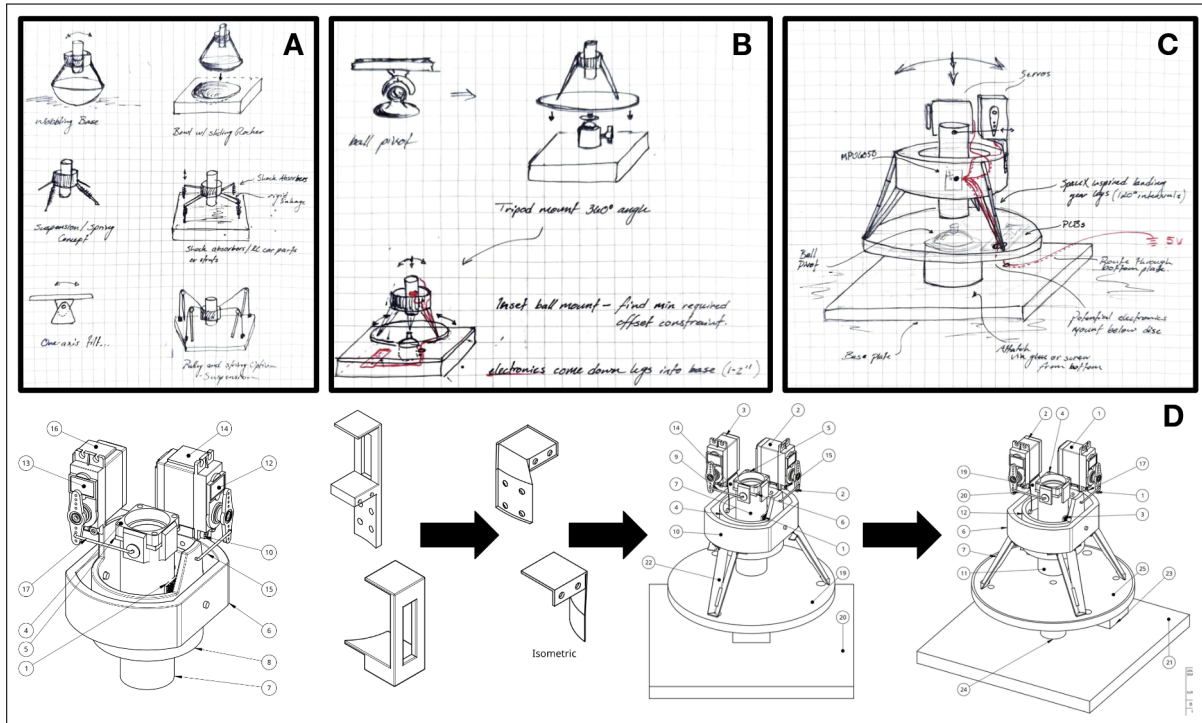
A) Conceptual base plate design sketches; B) Ball point pivot for base plate concept; C) Full base plate concept V.01 incorporating a base plate and connected ball point pivot joint for full range of motion; D) Assembly revision progression, showing evolution of the brackets, legs, and base plate geometry.
